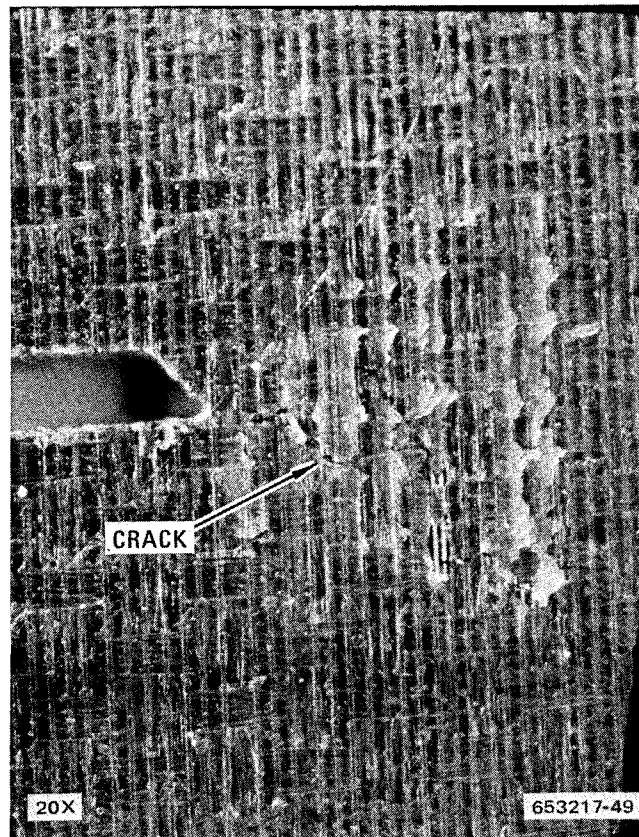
End of Slot in Specimen AC05-1 Showing Crack
